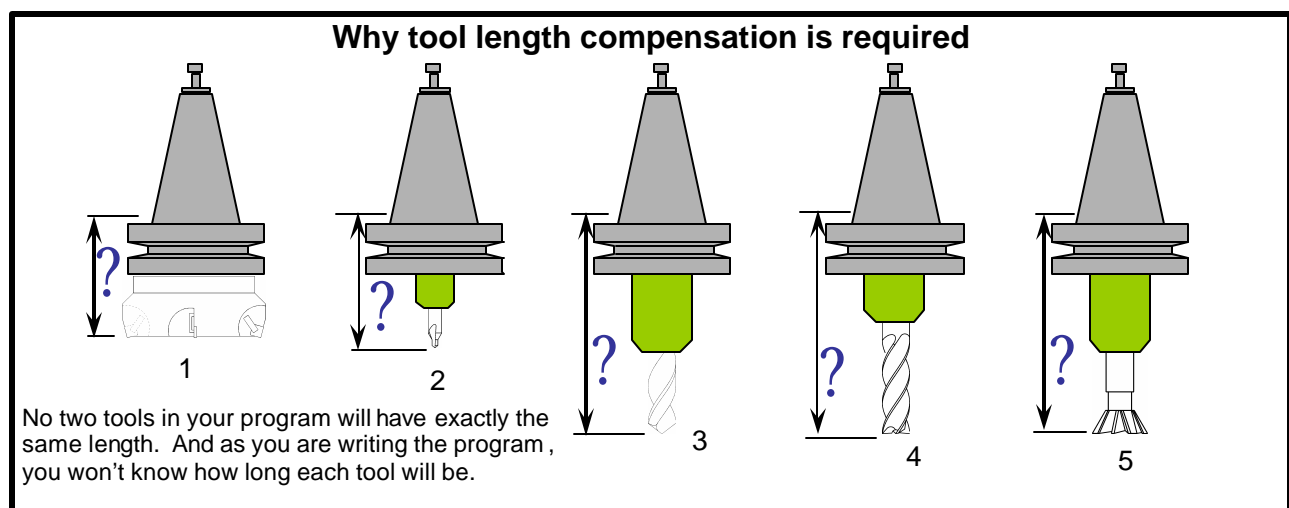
Five cutting tools that might be used in by a CNC machining center program
